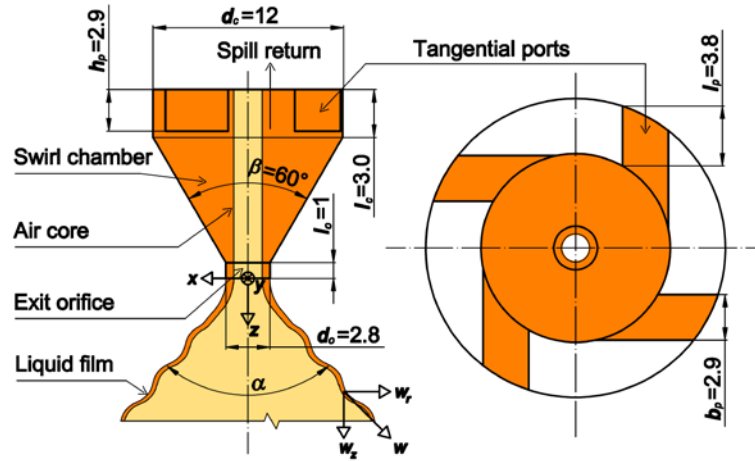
Schematic layout of the atomizer with main dimensions in millimetres. The coordinate system is identical with that in Fig. 3.
